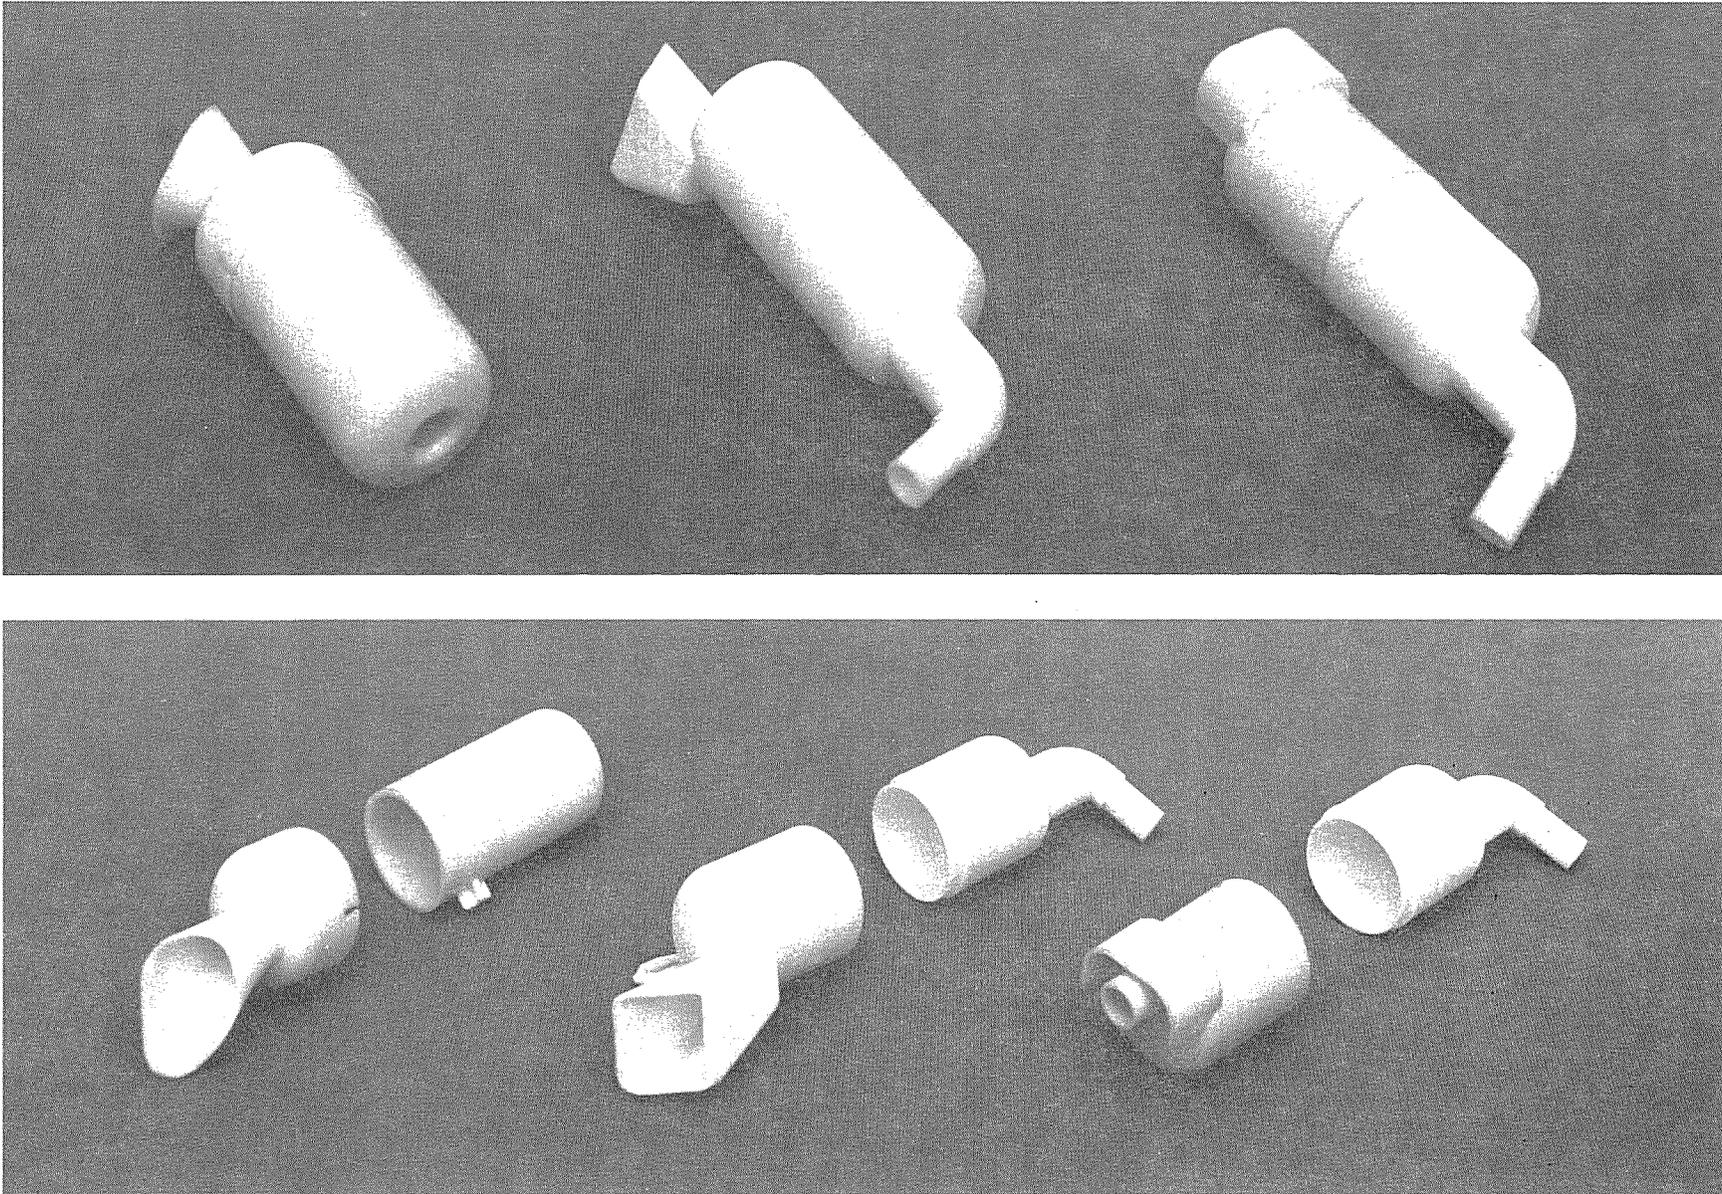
Thermoplastic Suction Mufflers Assembly and Parts
